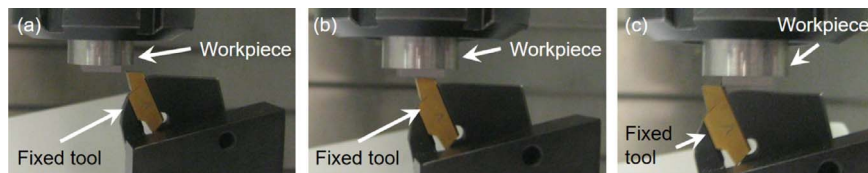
Experimental test sequence (a) Beginning of the cut: the tool enters in the workpiece, (b) Cutting, (c) End of cut: the tool leaves the workpiece, adapted from Ducobu et al. [21].
